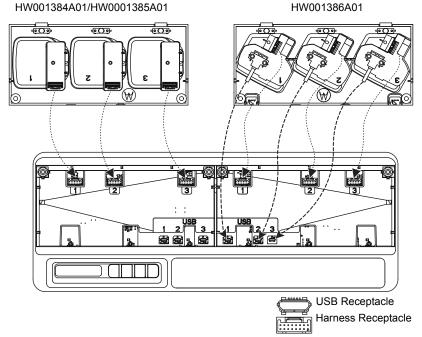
Securing Charging Pockets to Multi-Unit Charger Base
